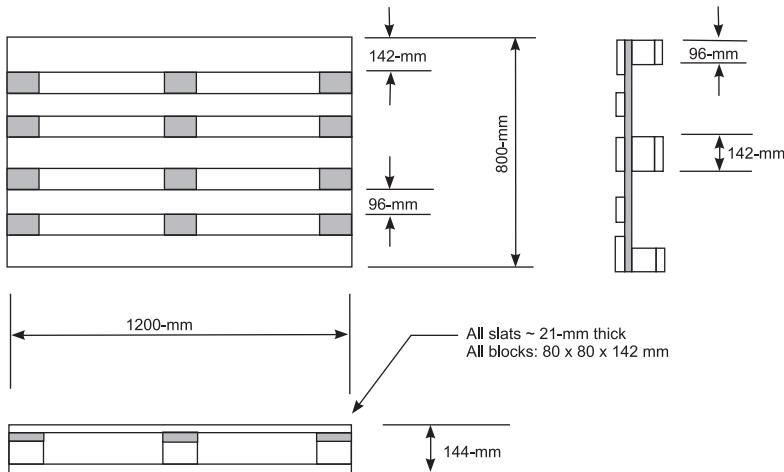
Typical dimensions of the standard EUR pallet
